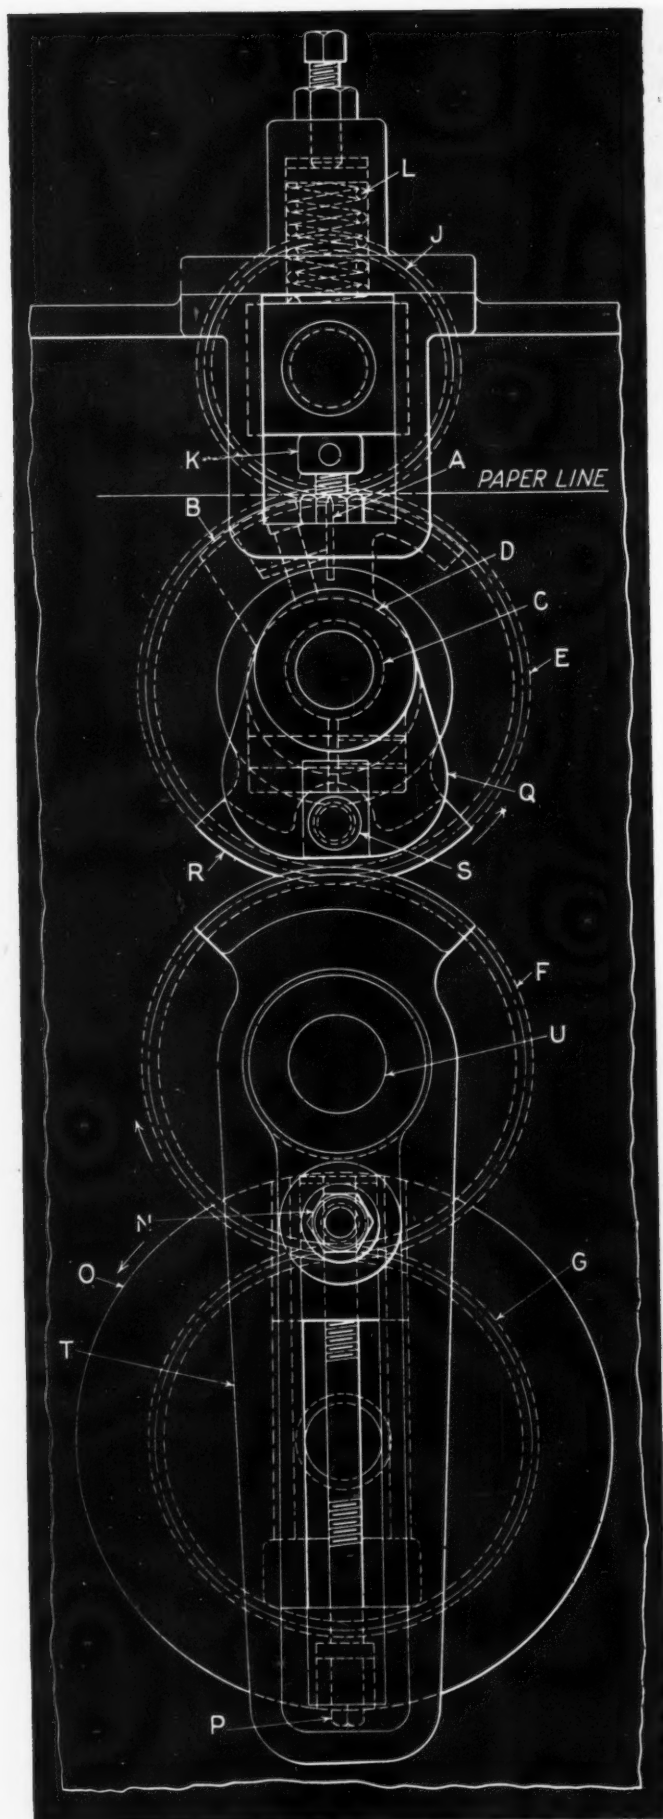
Enlarged End View of Mechanism Shown in Fig. 1
